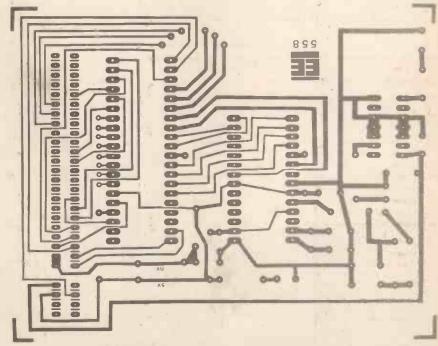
Printed circuit board component layout and p.c.b. master pattern. The 28-way double-sided edge connector should be mounted proud of the board on the 'tips' of the pins. This is to enable the unit to be mounted flush to the Spectrum.
